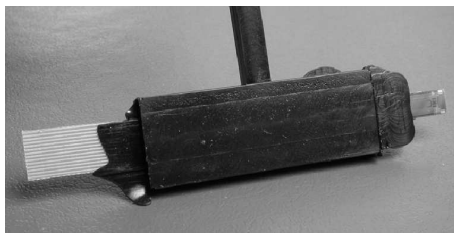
Chip packaged using Low pressure injection moulding of Macromelt. The chip is wirebonded to a PCB and placed in a mould. The mould is filled with melted thermoplast at pressures of 3-6 bar.
